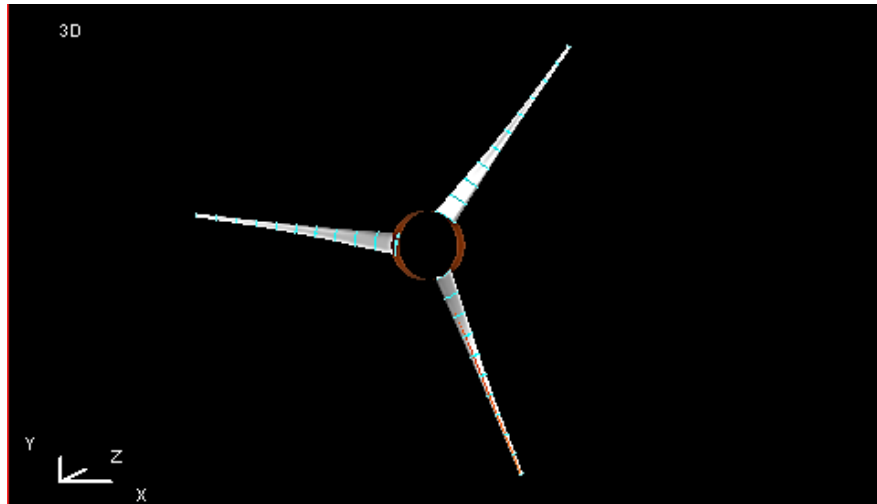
Geometry of 100 kW wind turbine rotor, AutoBlade™
